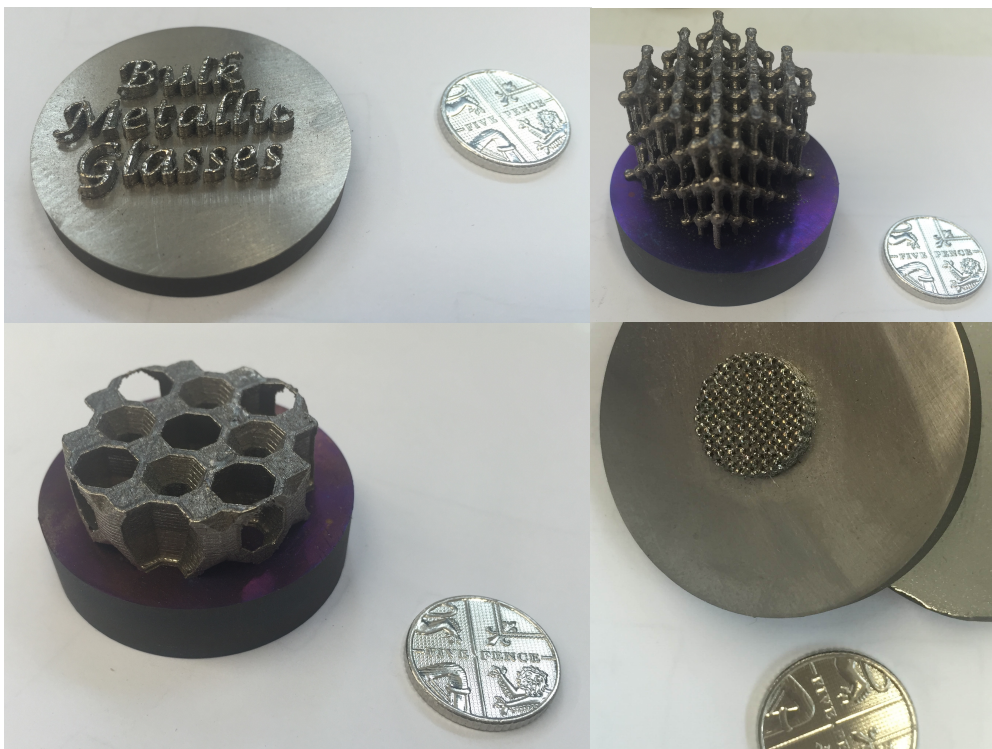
Complex shapes fabricated out of SAM1651 using the selective laser melting process.
